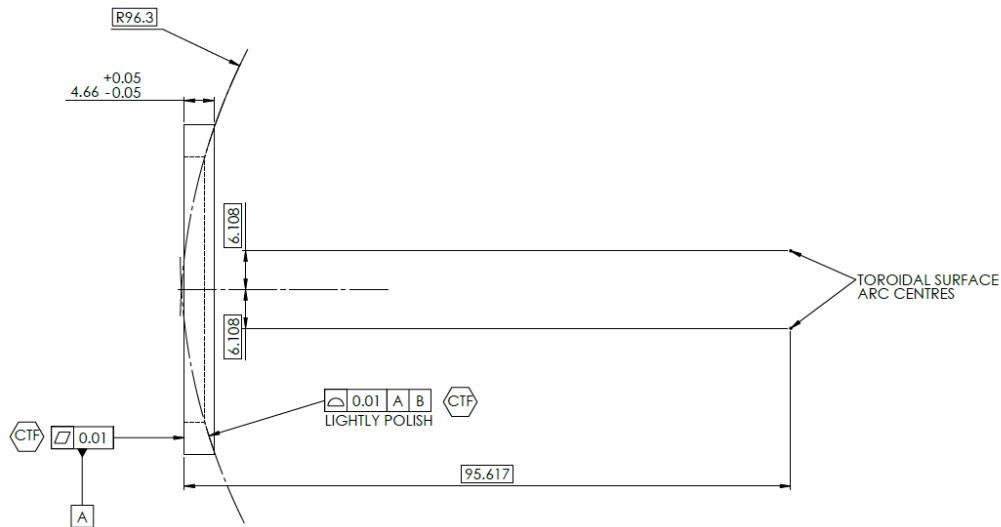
Example toroidal spacer mechanical tolerances.
